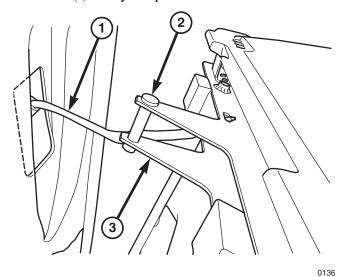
LINKSPAK/SWIVELPAK Striker Assembly
